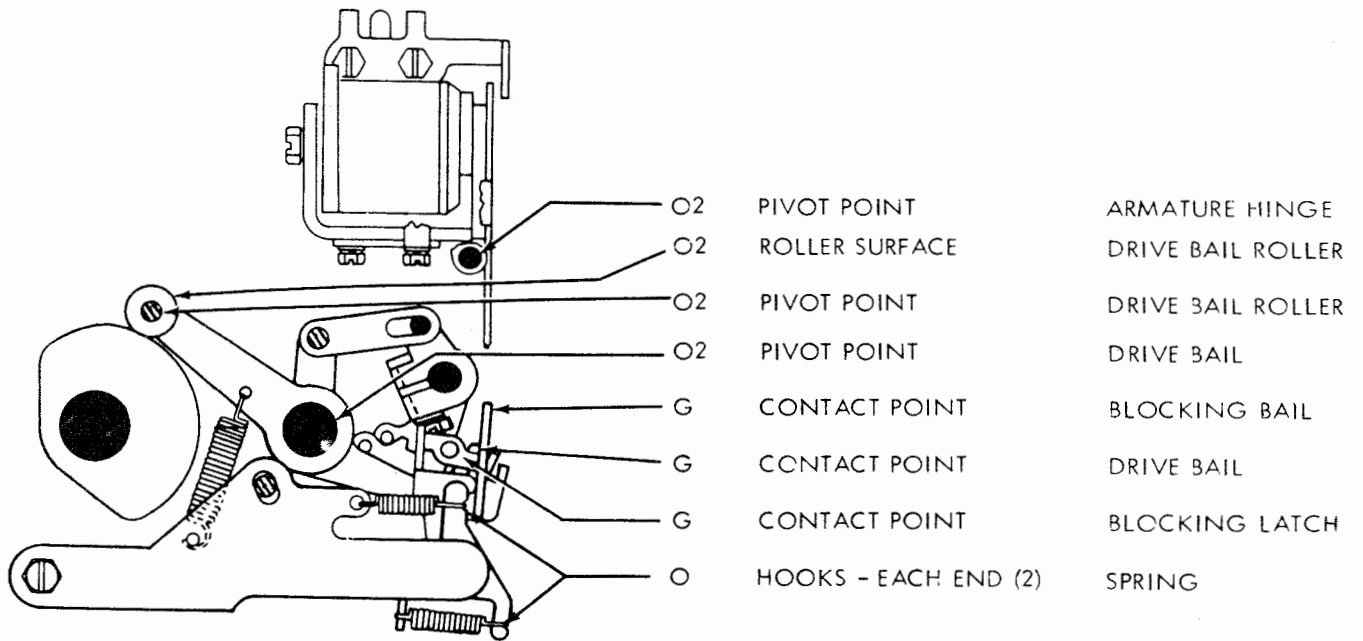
A. Typing Reperforator TT-373/UG Lubrication-Back Space Mechanism
